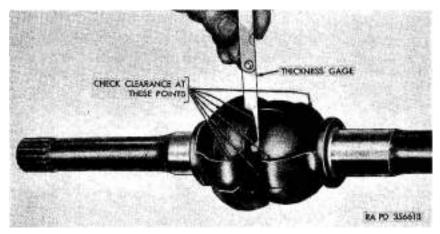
Checking 'universal drive joint assembly clearance with thickness gage.
